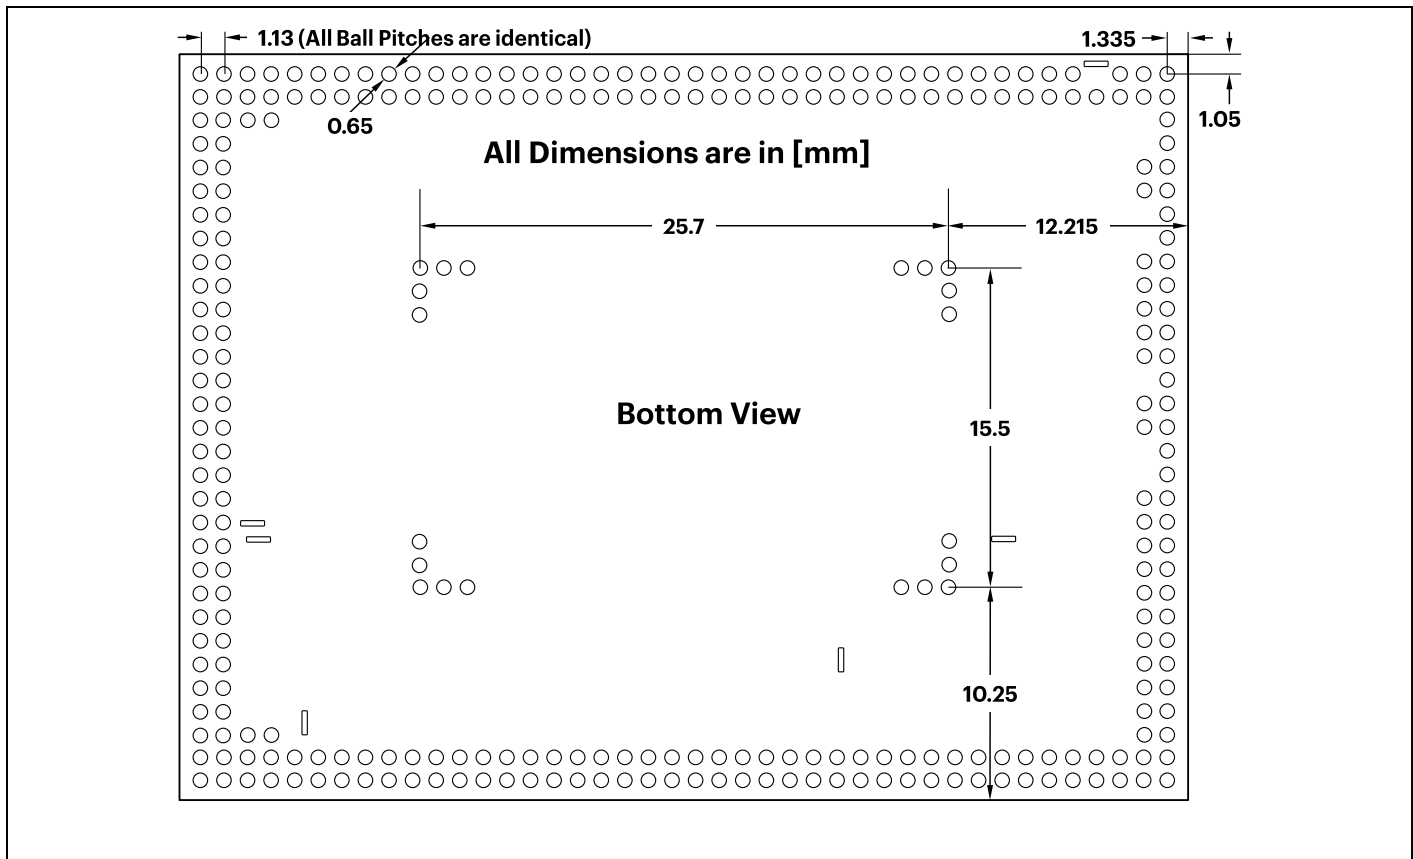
ARTIK 530 Module Mechanical Dimensions Bottom View
